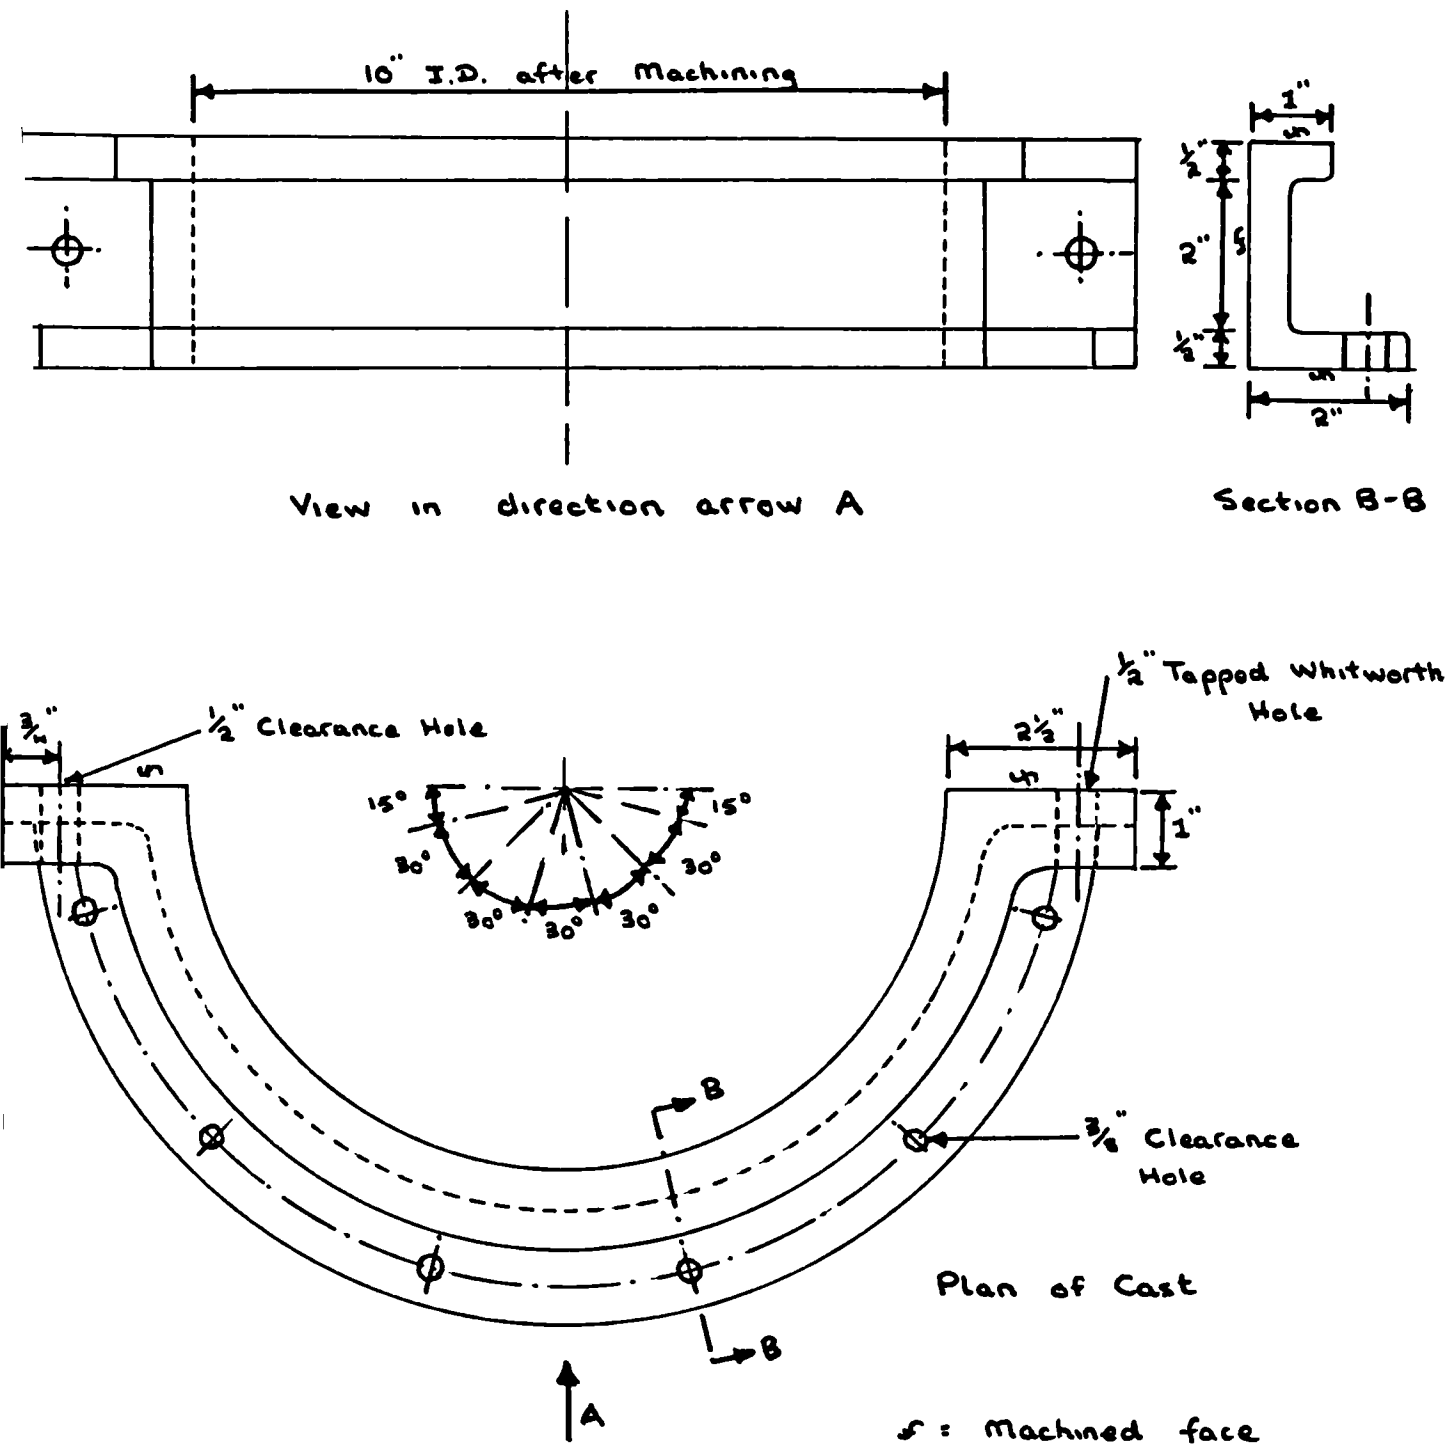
Details of half mould of Cast Iron used for casting Pore Pressure - Shrinkage Specimen.
